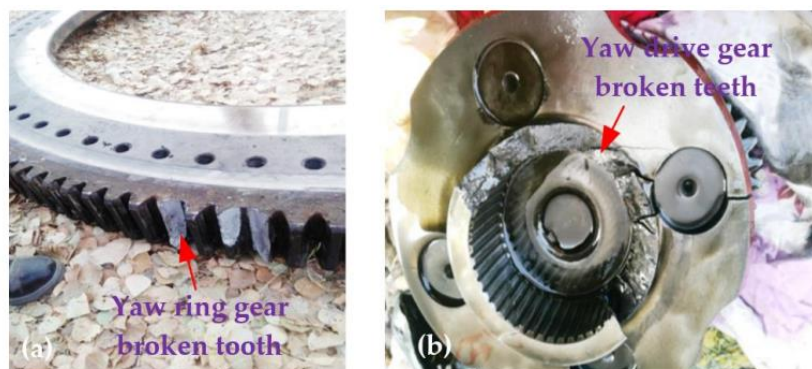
Two common failure modes in wind turbine yaw gears: (a) a broken tooth in the yaw ring gear; (b) multiple broken in the yaw drive gear
